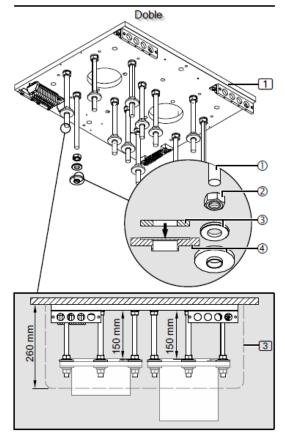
Fitting of the upper insulation to the threaded bolts without a false ceiling
